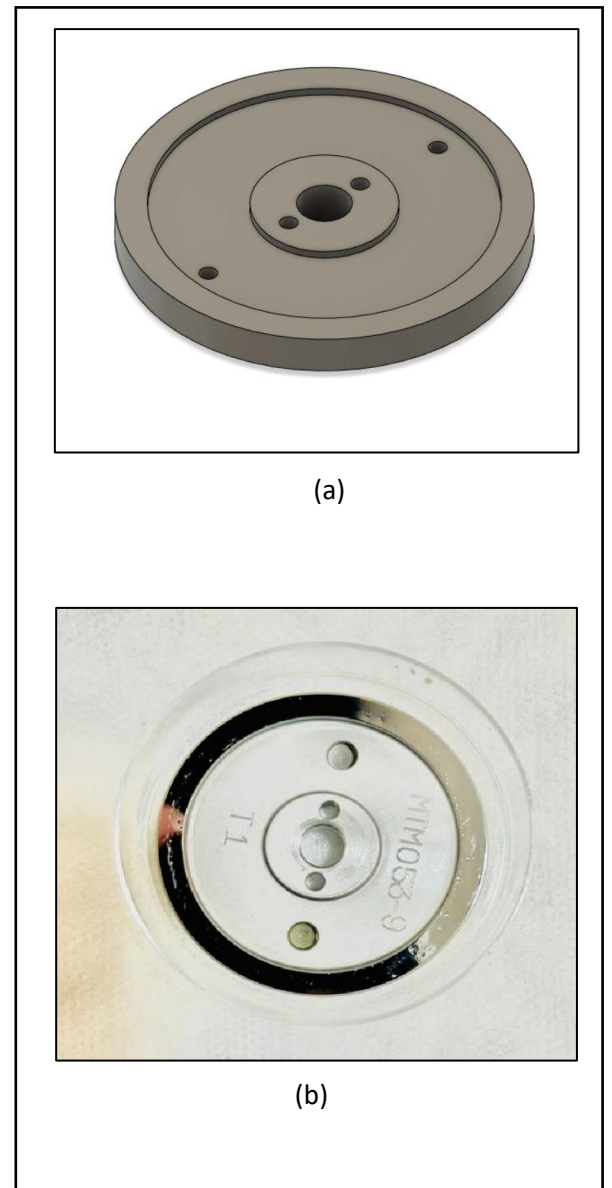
3D model of Rotating Disc (a) and Component (b)
